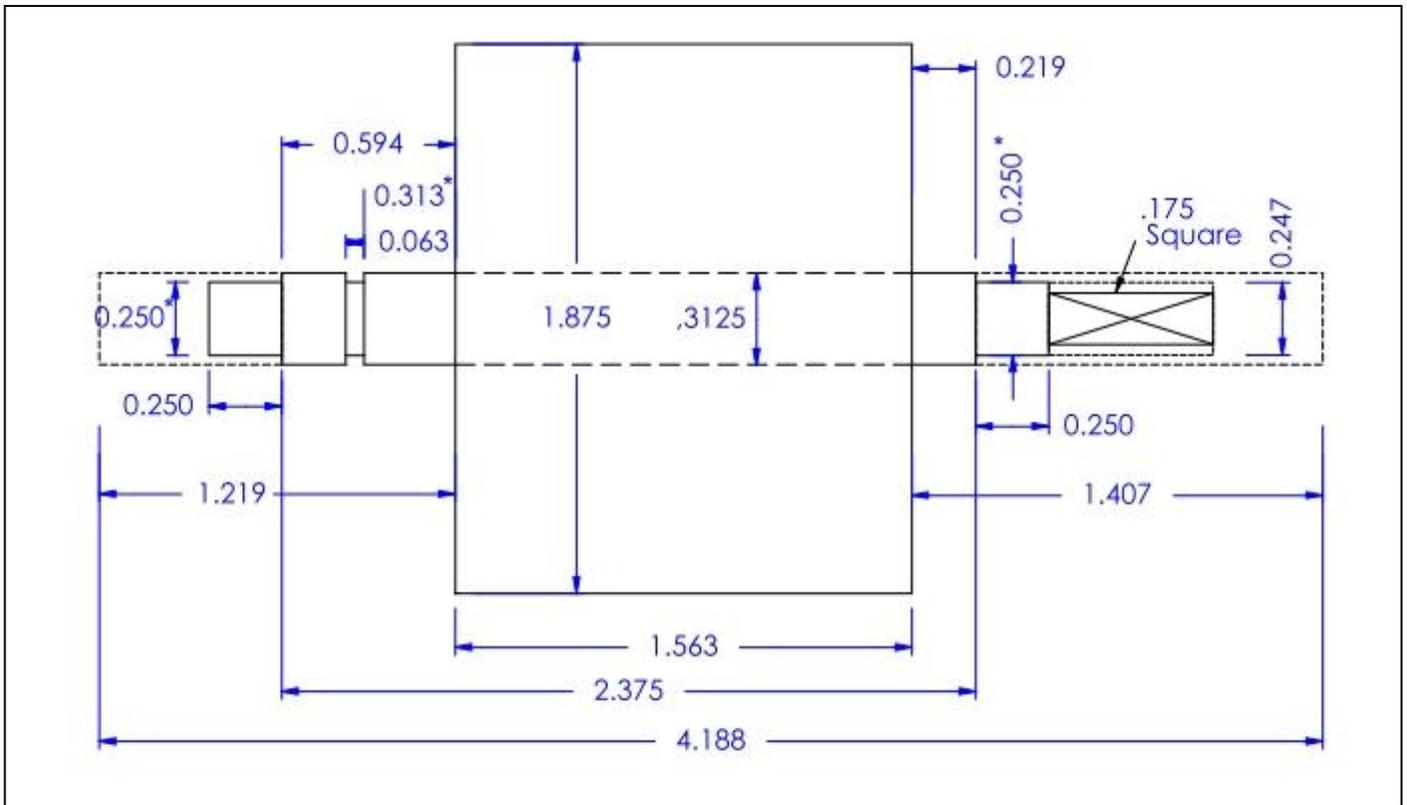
Construction drawing of the fusee blank and arbor. Dimensions marked with an asterisk are determined by measurement. The pivots are turned to fit a 1/4" ballized hole. The slip washer groove location is found after the fusee is grooved and the great and maintaining wheels are installed on the arbor. The dotted lines at the ends of the arbor indicate extra length to accept center holes for mounting the assembly between centers.
